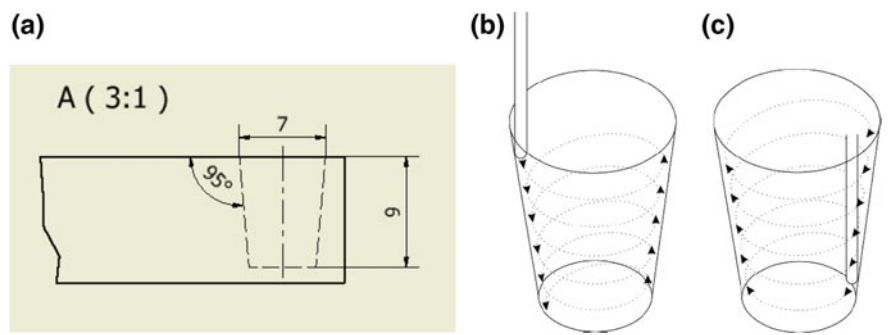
a Geometry of cone; different machining strategies: b spiral pressing cut, c spiral pulling cut
